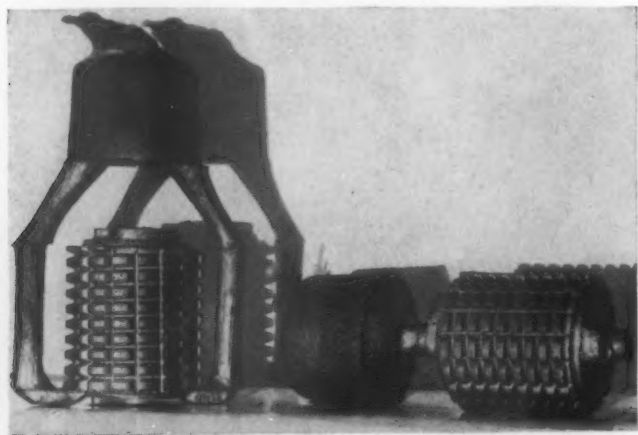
A HOB MILLING CUTTER CASTING SPUN IN GREEN SAND.
